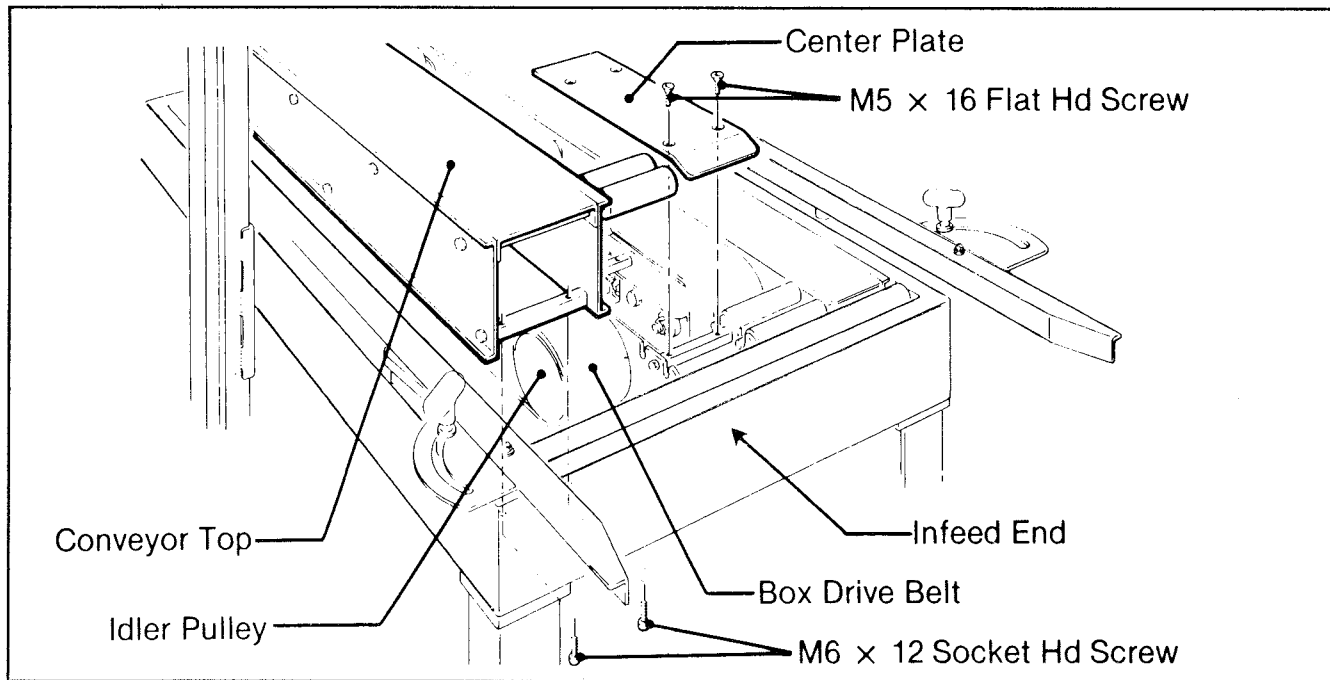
Box Drive Belt Adjustment - Frame Bed Infeed End
